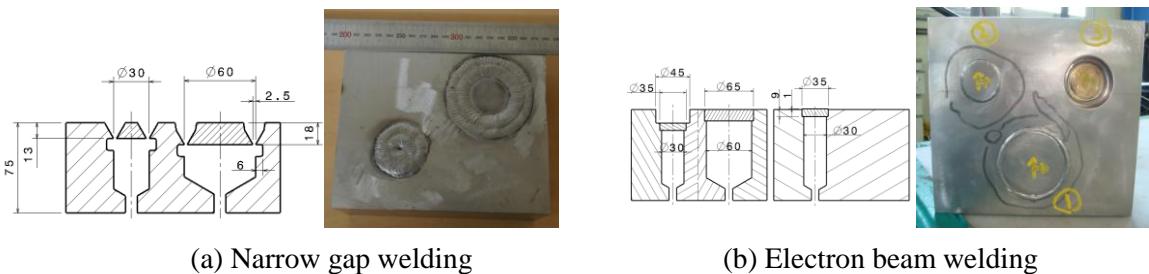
Plug mock-ups based on EBW and narrow gap welding.
